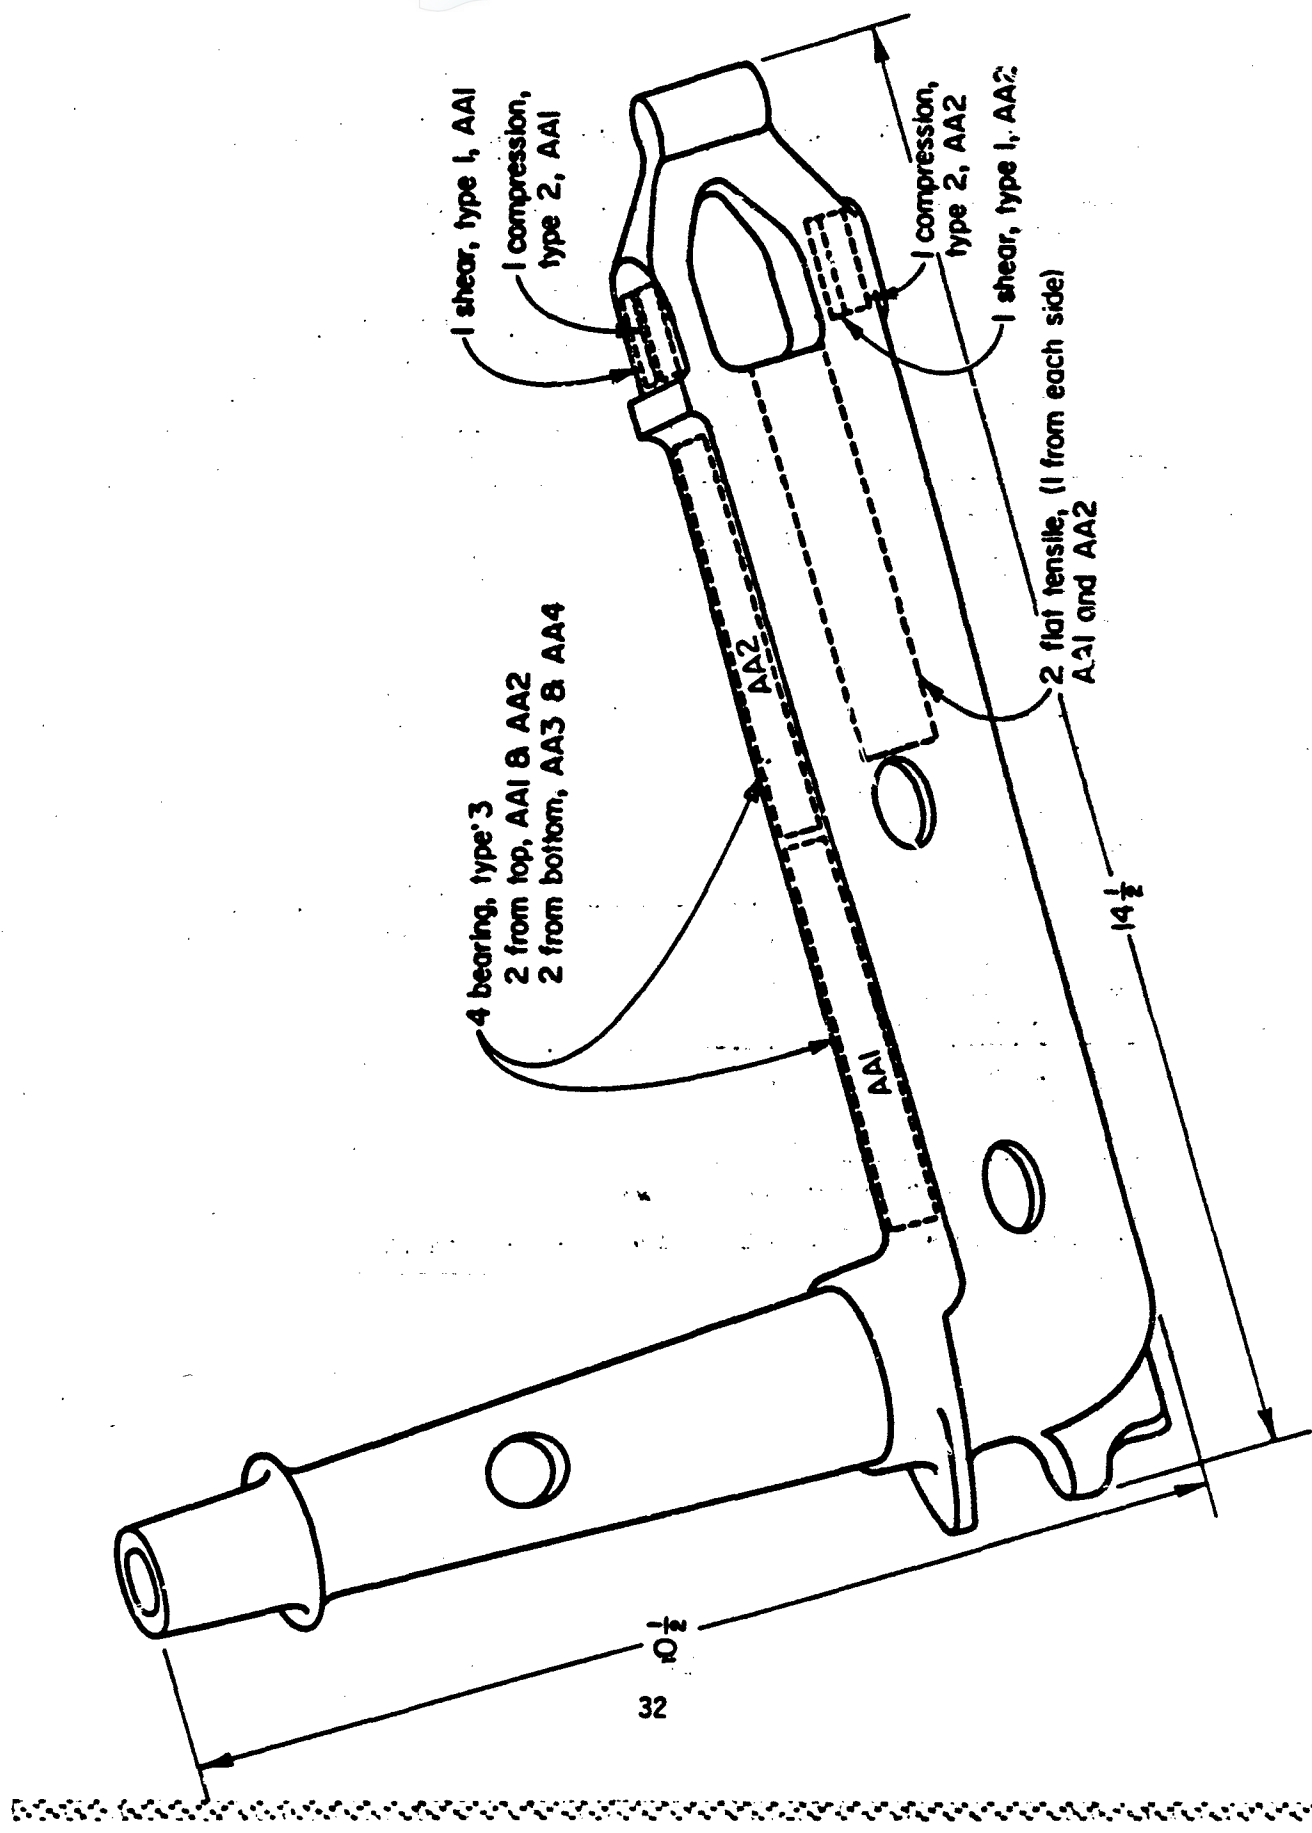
LOCATION OF TEST SPECIMENS FOR CASTING AA
